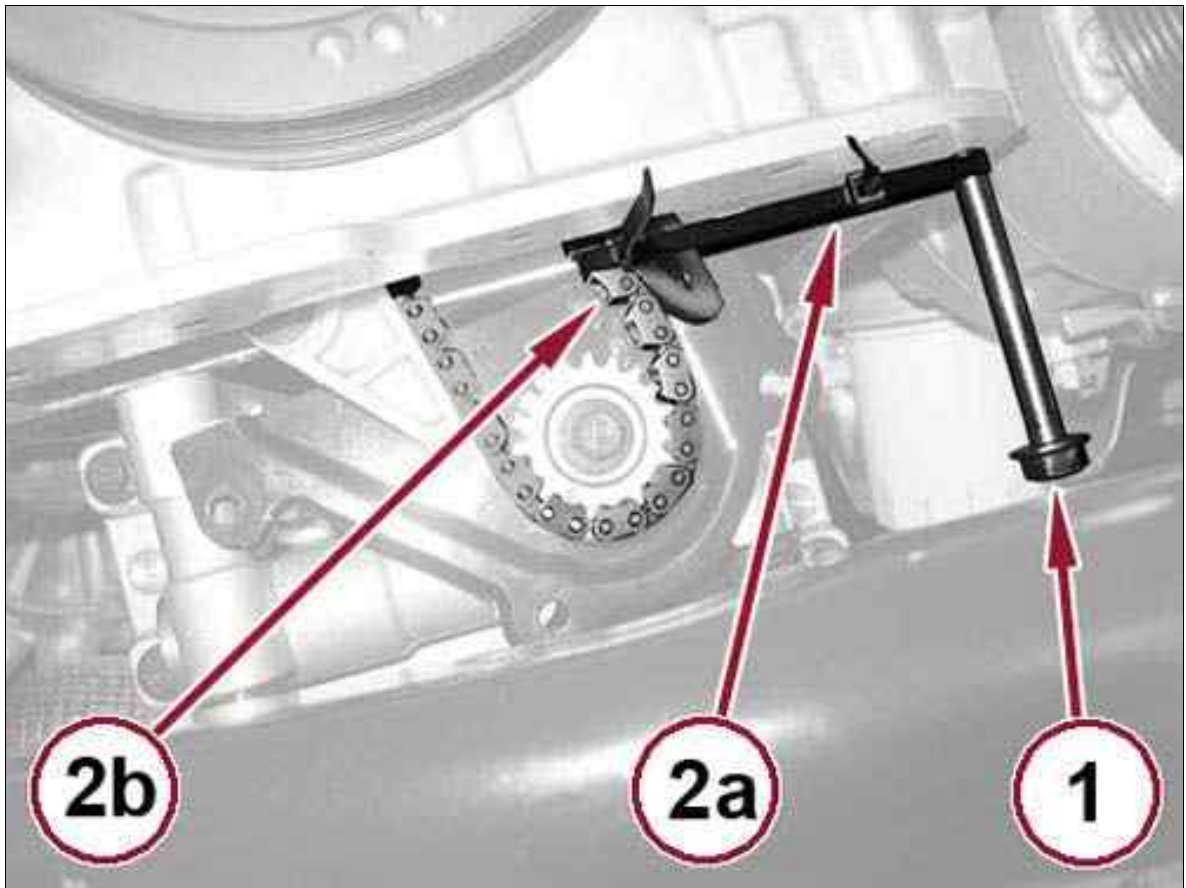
Marking Chain Link Corresponding To Balance Shaft/Oil Pump Sprocket Timing Mark
